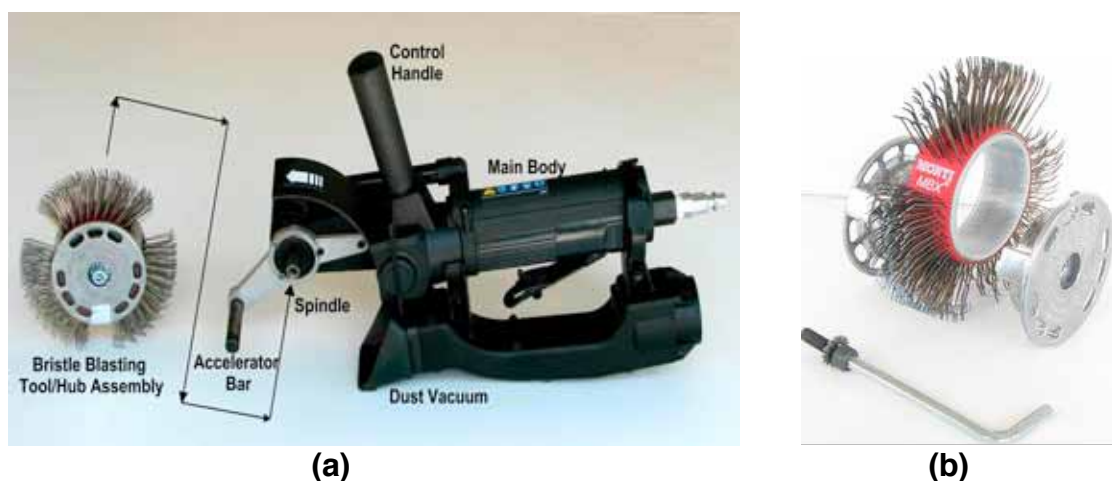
(a) Components of bristle blasting power tool, including tool/hub assembly and power tool body with pneumatically driven spindle, and (b) Assembly view of bristle blasting tool along with attachment hubs
